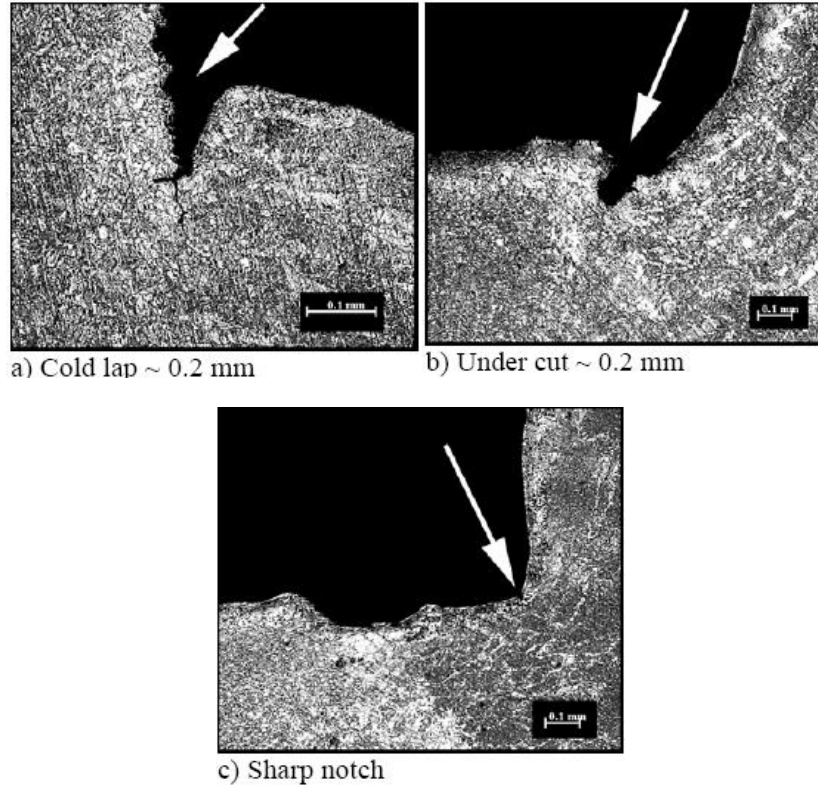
Typical crack-like defects on welded structures [5].
